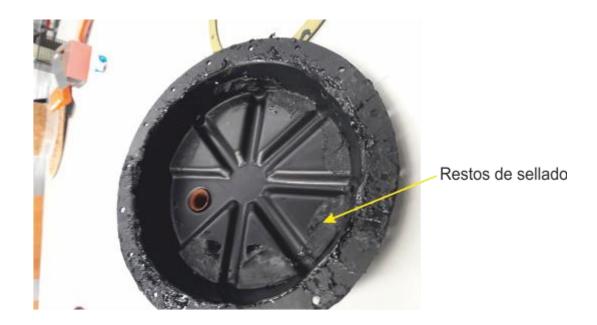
Half of casing to which diaphragm assembly had adhered
